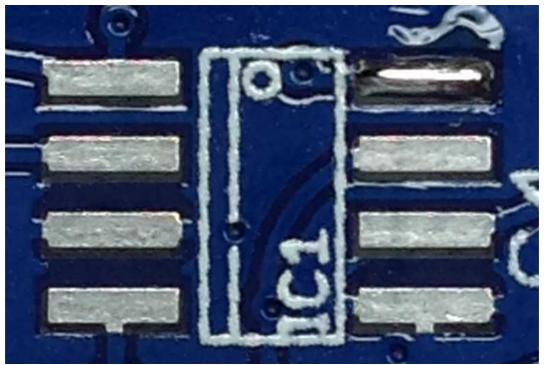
IC1 pads showing the pad of pin 8 pre-soldered
